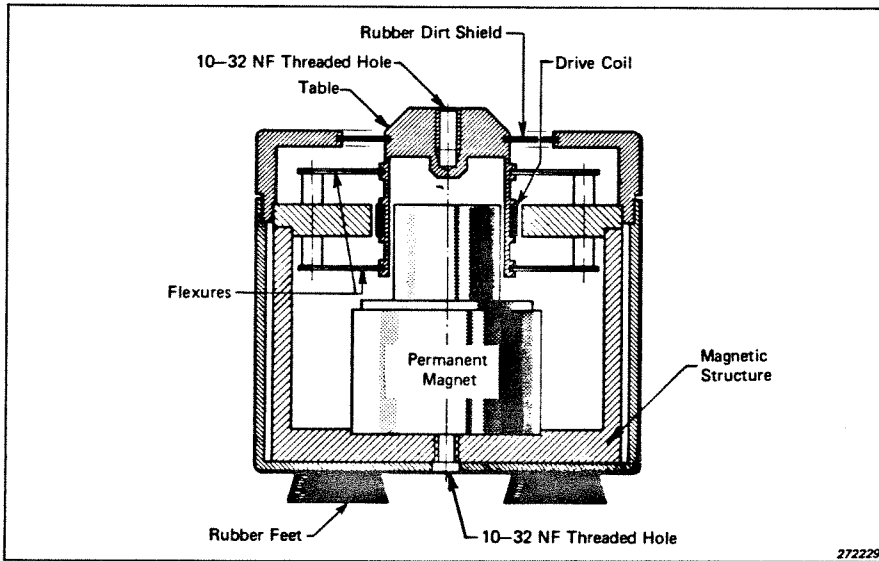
Sectional drawing of the Mini-Shaker type 4810.
